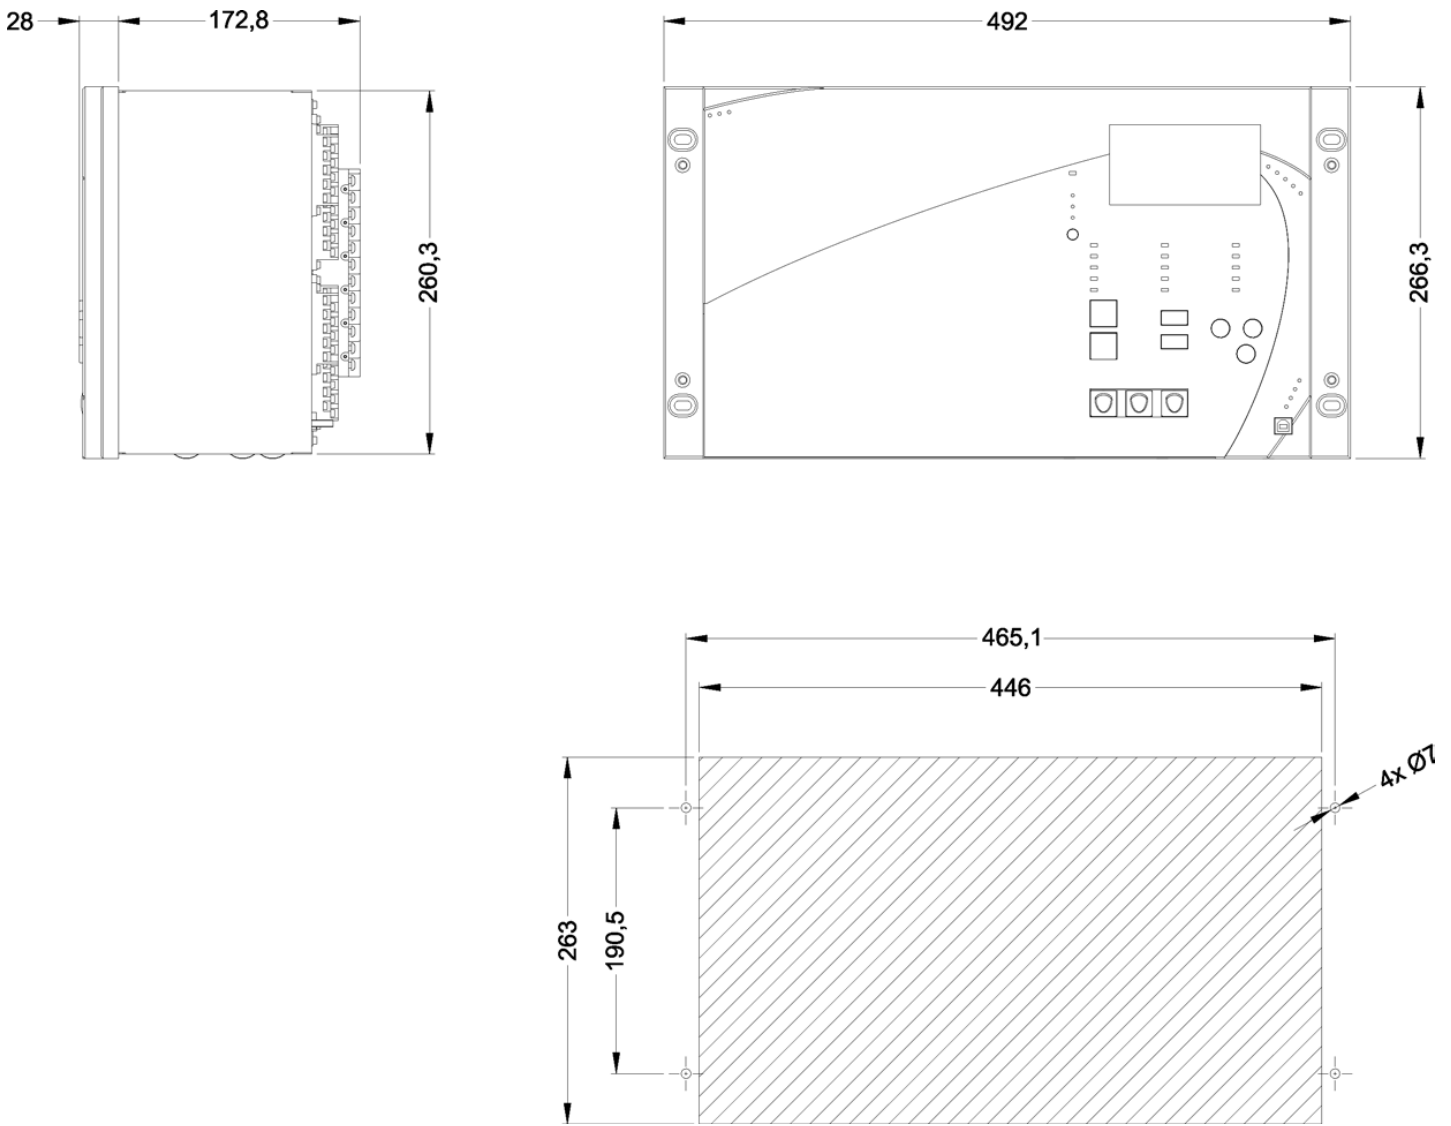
Drilling dimensions for full rack relay (B2216H2)
